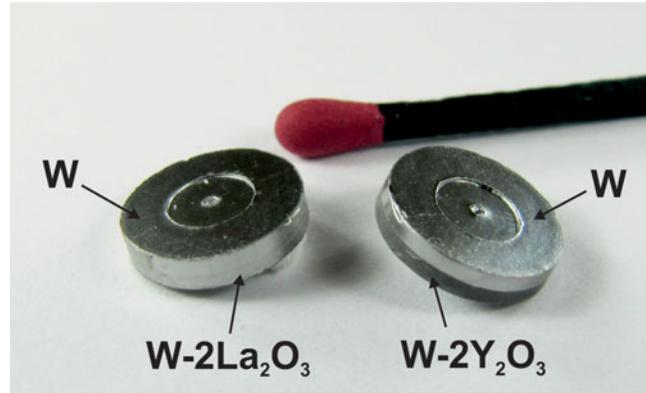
2-Component insert W-PIM: finished parts after heat-treatment.
